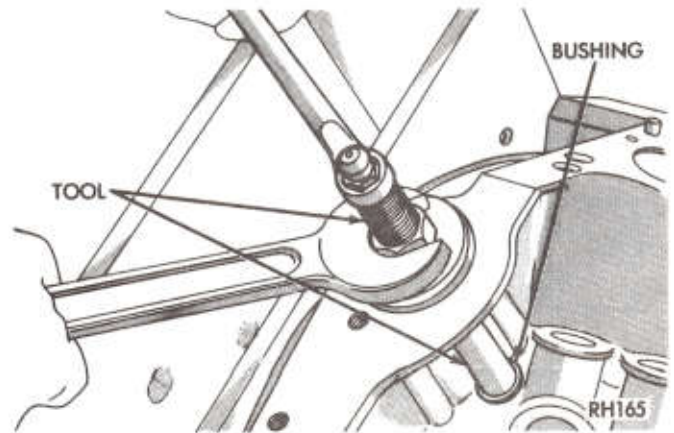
Burnishing Distributor Drive Shaft Bushing
